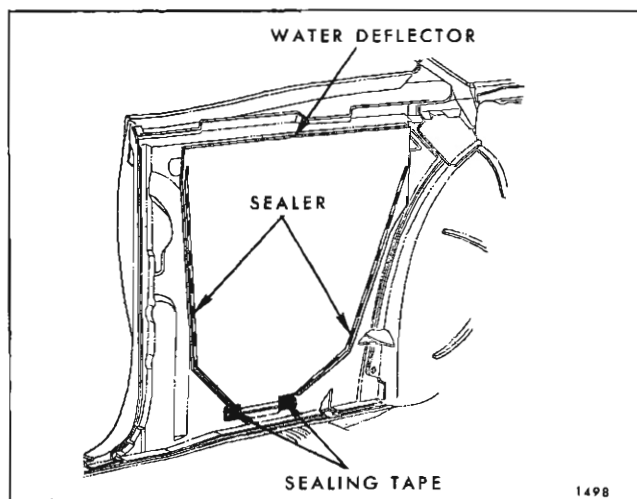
E15—Rear Quarter Inner Panel Sealing "37" & "57" Styles
